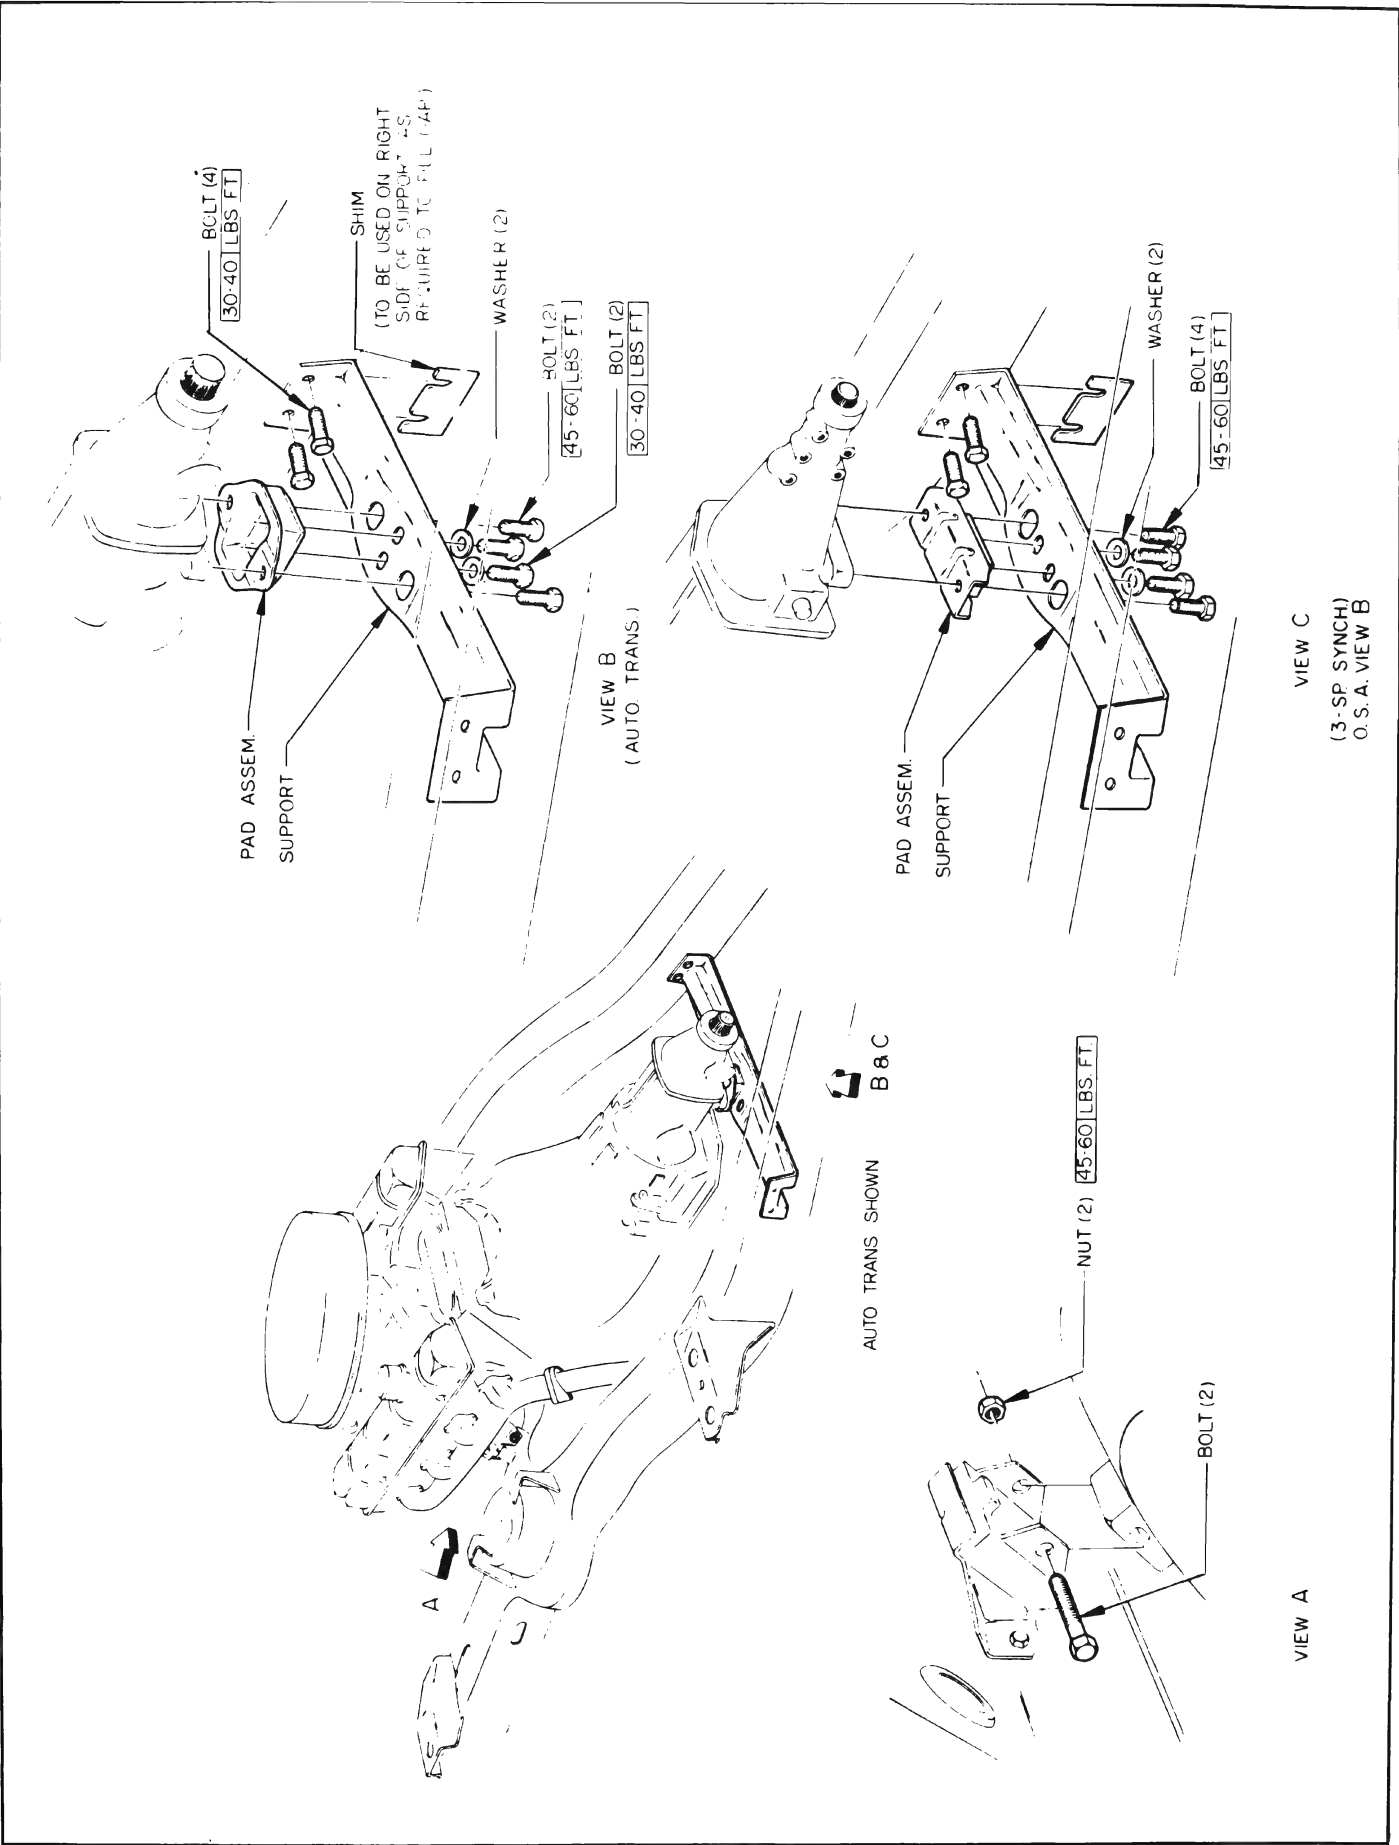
Engine and Transmission Mounting (4400 Series)
